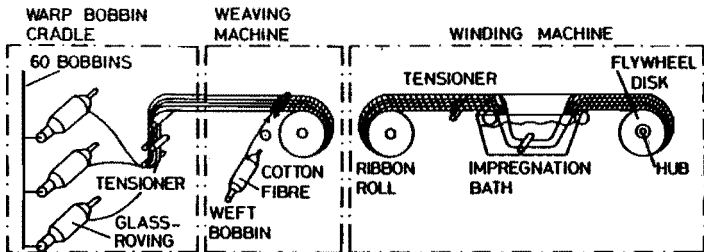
Fabrication of WRWP flywheel [8.7].
